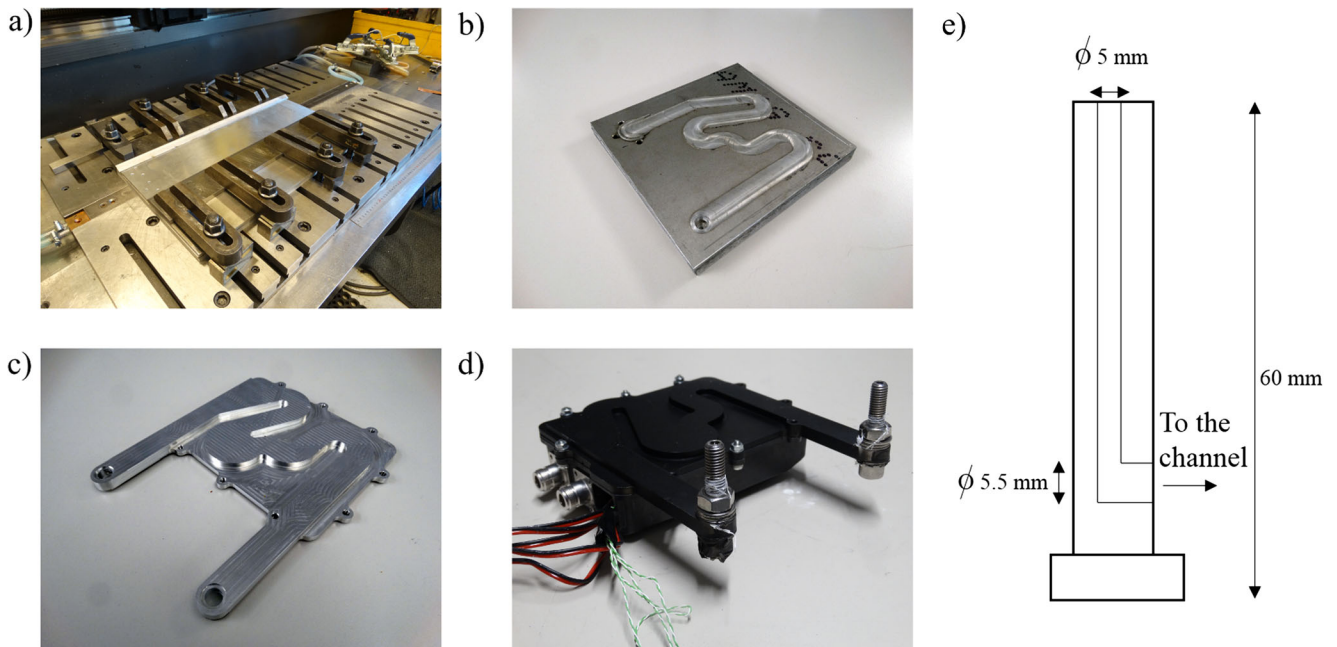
Manufacturing process of the HFSC prototype showing a clamping of 5- and 8-mm plates for HFSC process, b plates with weld and channel after HFSC, c HFSC prototype after milling the shape of the
